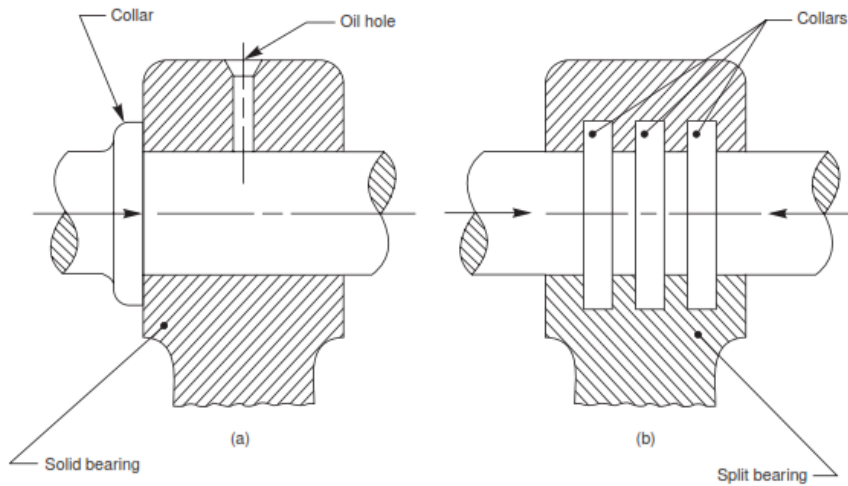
(a) Single collar bearing, (b) Multi-collar bearing
